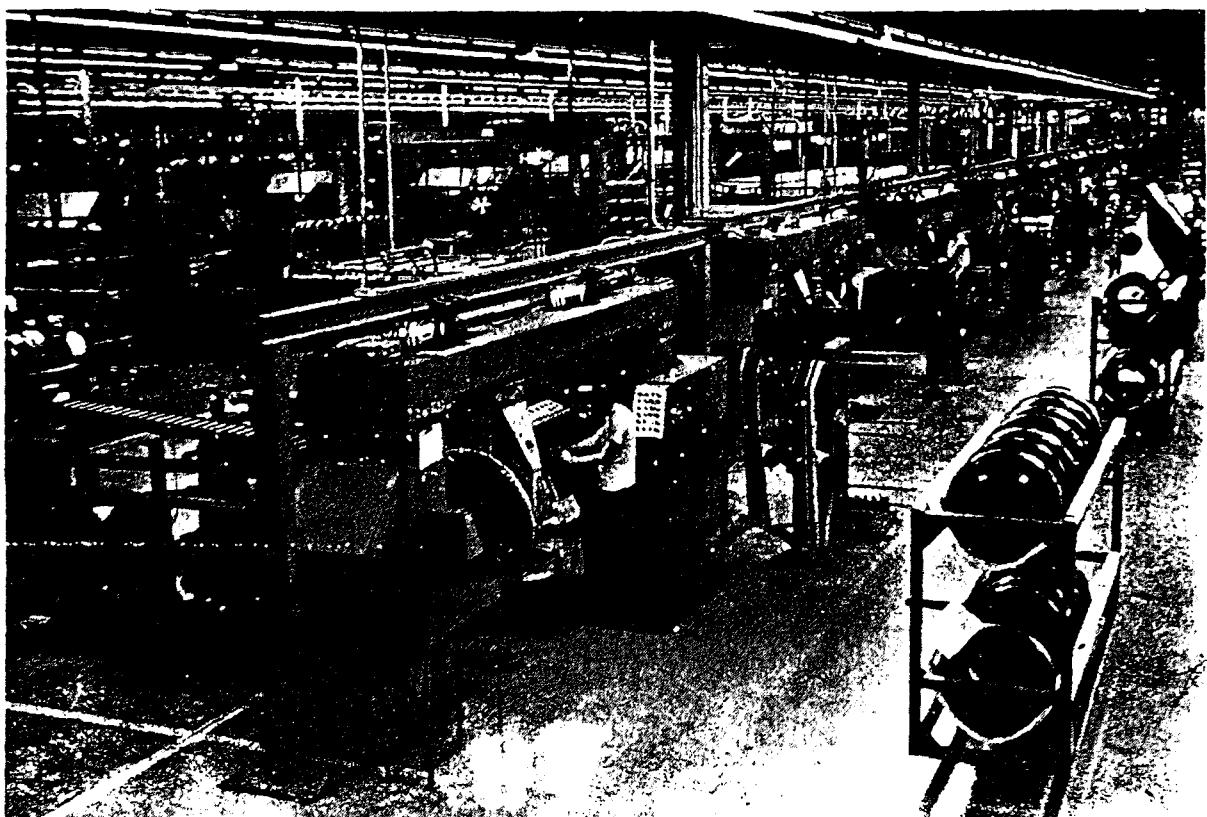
Radial-tire building machine. The carcass is built on a cylindrical drum and then shaped within the tread and bell. (*General Tire and Rubber Co.*)
